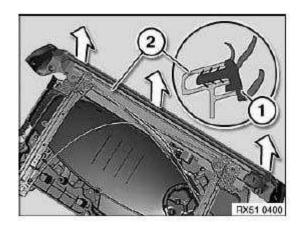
Pulling Window Cavity Cover Strip Off Retaining Plate Courtesy of BMW OF NORTH AMERICA, INC.
